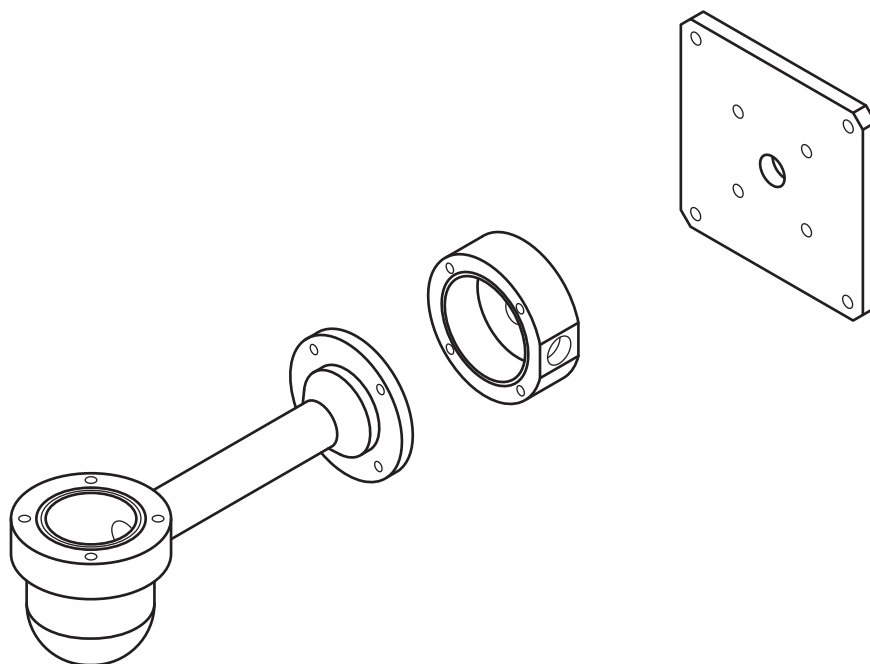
Typical wall mount (from left: Wall Mount Bracket (MIC-WMB), Shallow Conduit Adapter (MIC-SCA), and Spreader Plate (MIC-SPR))
